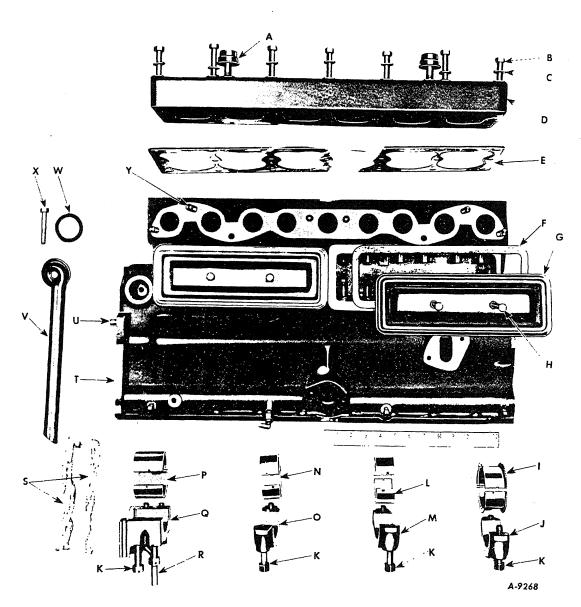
ENGINE CYLINDER BLOCK AND HEAD
